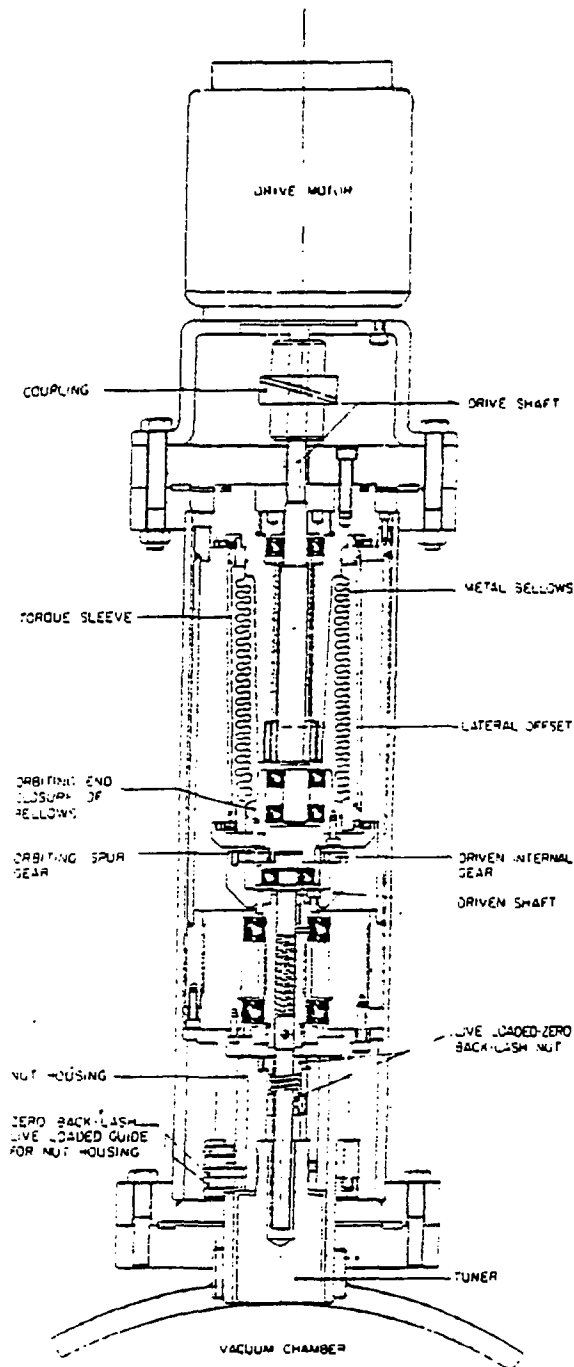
HERMETICALLY SEALED DRIVE FOR A VACUUM CHAMBER
